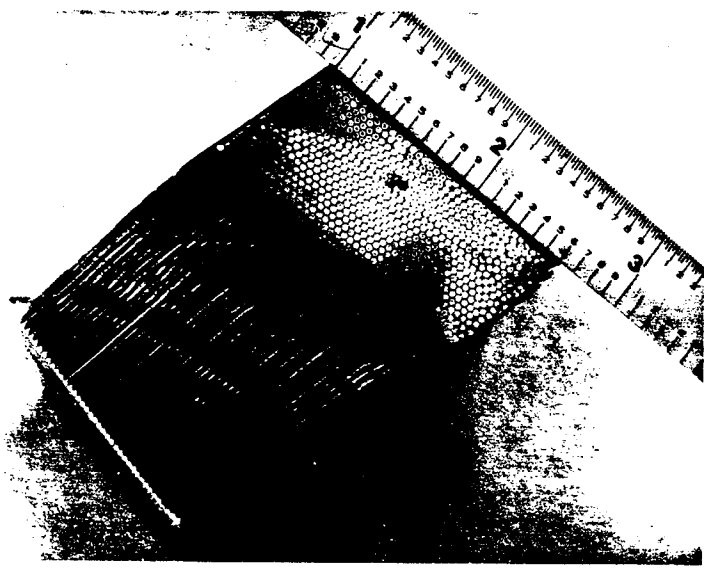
A section through the end of a test hexapole coil shows a well ordered winding, achieved by using a constant length form shape.
